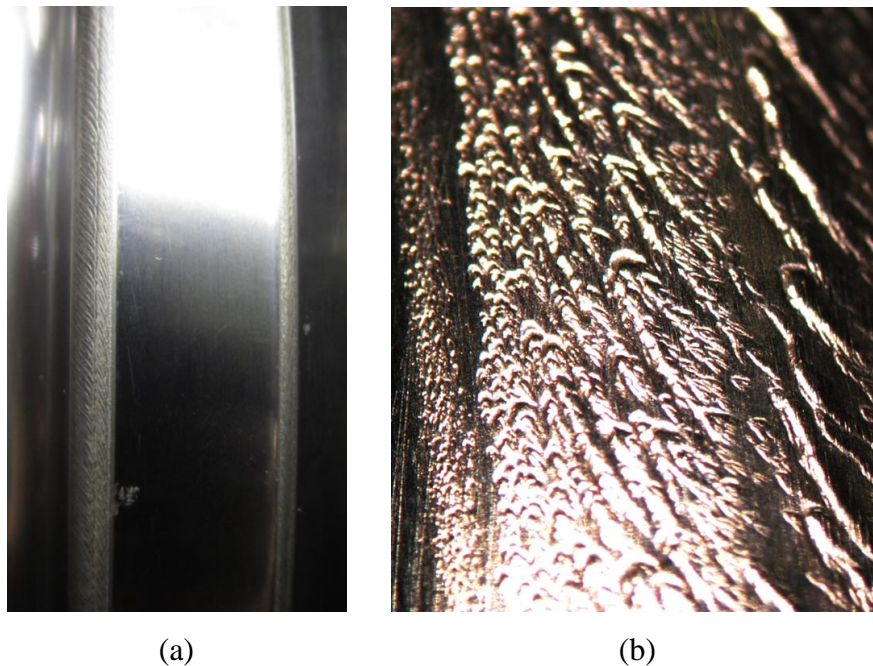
(a) Pickup on roll forming tool where the s-section and tongue is bent and (b) close up on pickup in a stereo microscope - which sometimes look like tool damage because the stainless steel look like the tool material
